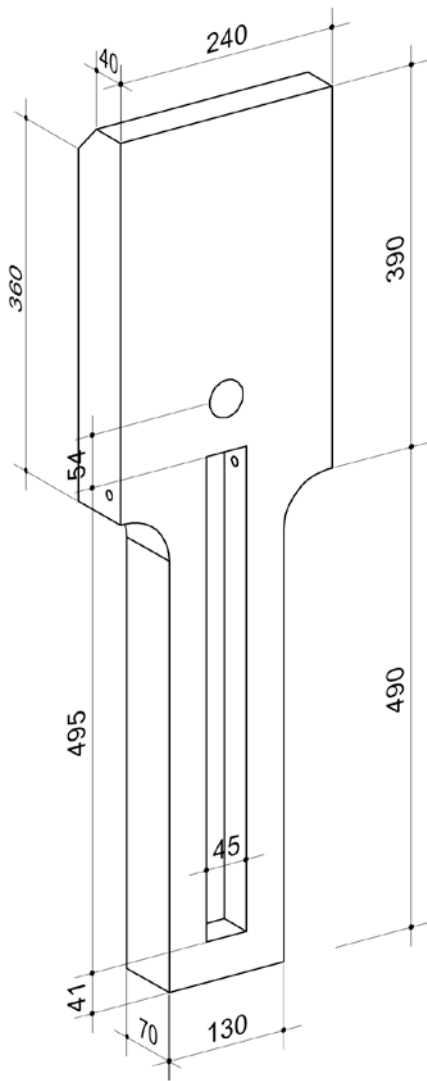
DETAILED DIMENSIONS - UNDER SIDE OF END BOARD (CLAMP)
